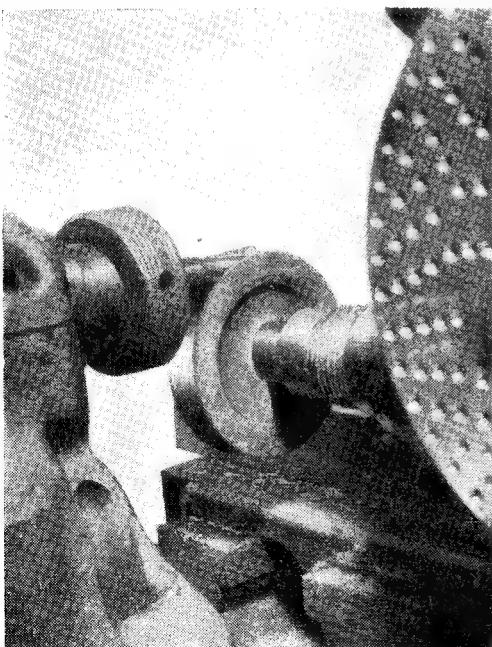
Using the head to mill the bevel on one of the fingers
